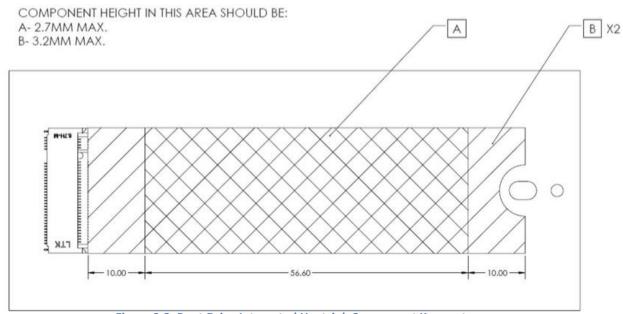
Boot Drive Integrated Heatsink Component Keepout
